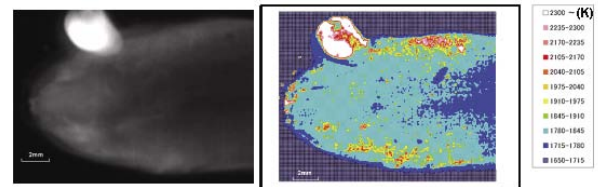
Weld pool temperature in CO₂ arc welding.
